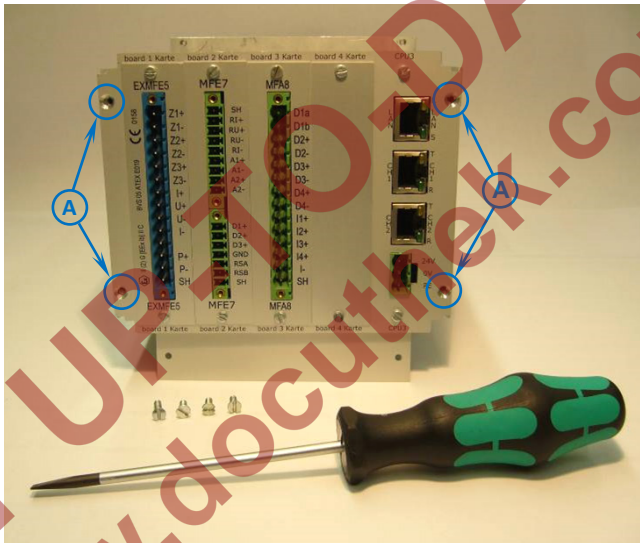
Rear side of the device (example), mounting screws are removed
